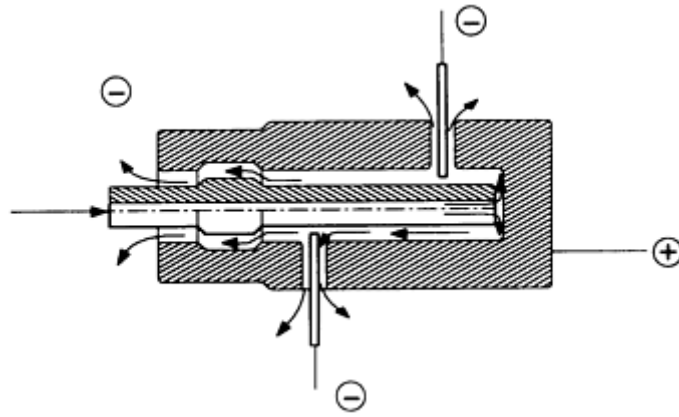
Schematic of electrochemical machining: smoothing, deburring, and radiusing of piston pin. Machining parameters: U (in Fig. 2) = 17 V; electrolyte pressure, 0.3 MPa; electrolyte, 15% NaCl; time of machining, 75 s; maximum current per piece, 180 A
